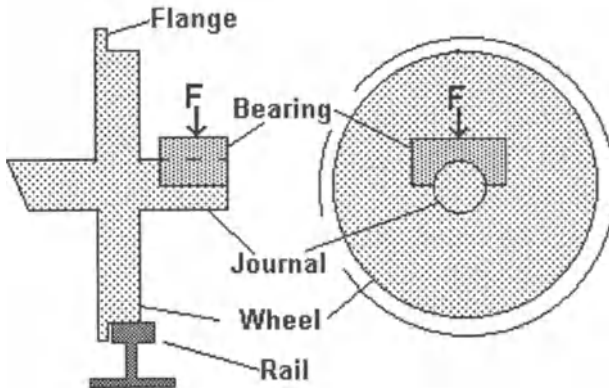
Schematic diagram of a bearing block that transfers load from a railway car to an extended journal. Not shown is a sump below the journal, which is attached to the stationary bearing structure, and supports a cotton wick that transfers a thin film of oil to the journal. Modern cars use tapered roller bearings.
